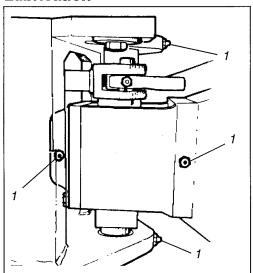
Steering joint, right side 1 Lubricating Nipples
